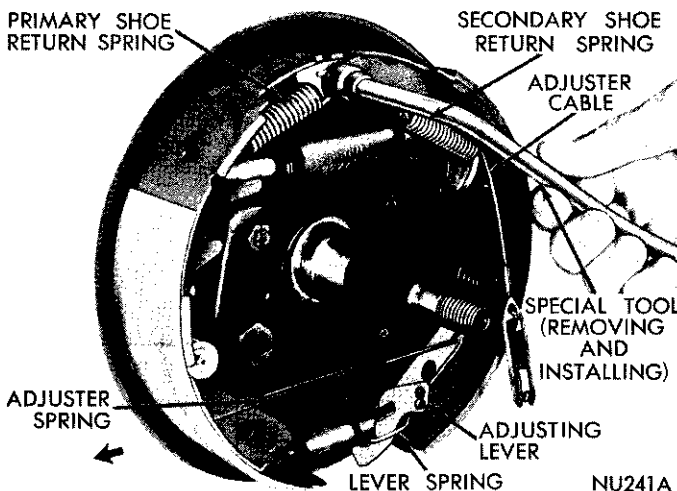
Removing or Installing Shoe Return Springs (Left Front)
